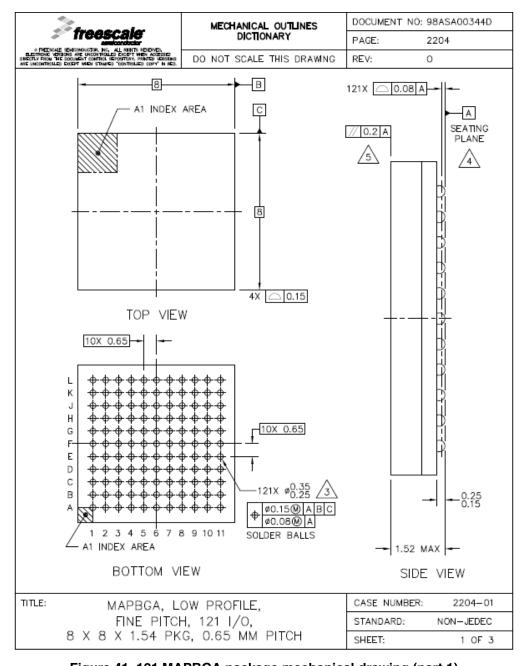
121 MAPBGA package mechanical drawing (part 1)
